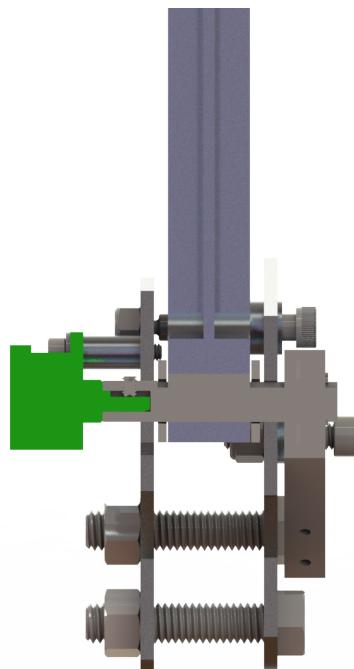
Mechanical fastening and connection to the throttle pedal. Note that the torque encoders are two encoders housed in one package
